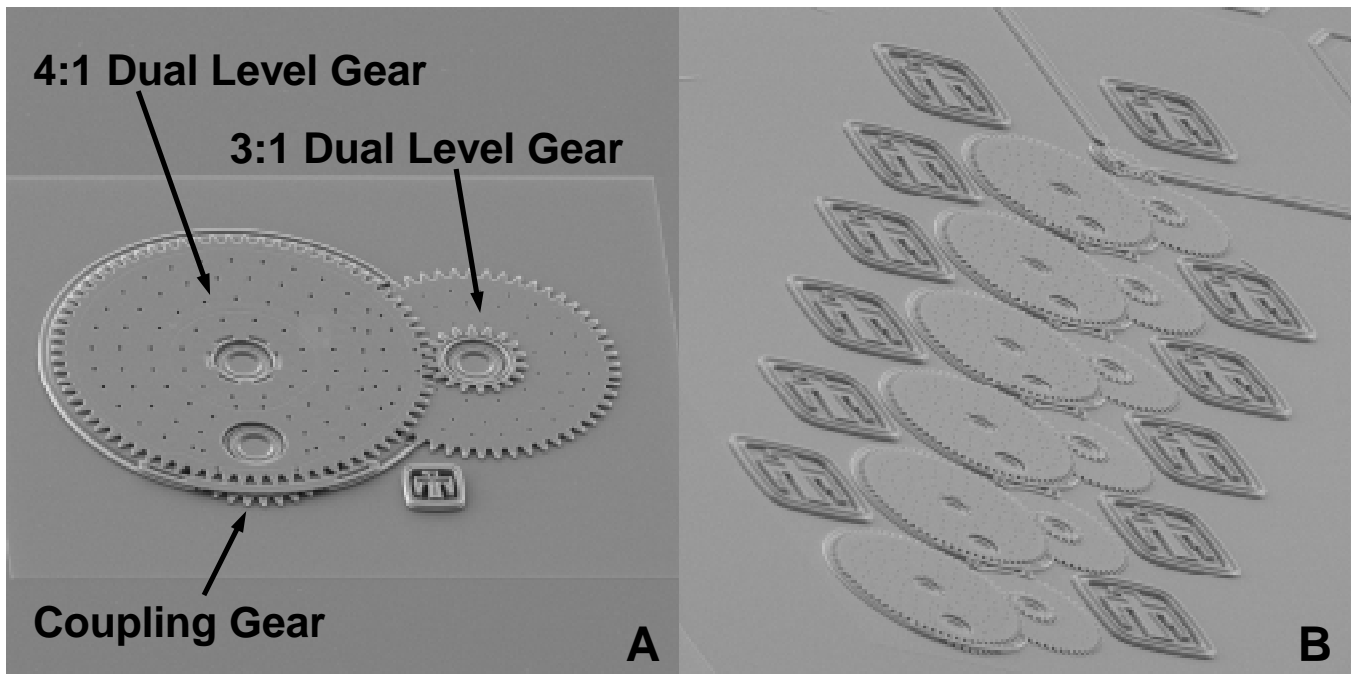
A) Each 12:1 gear reduction unit contains one 3:1 dual level gear, one 4:1 dual level gear, and one coupling gear. B) Six of these units are cascaded together to form a single 3,000,000:1 transmission assembly.
